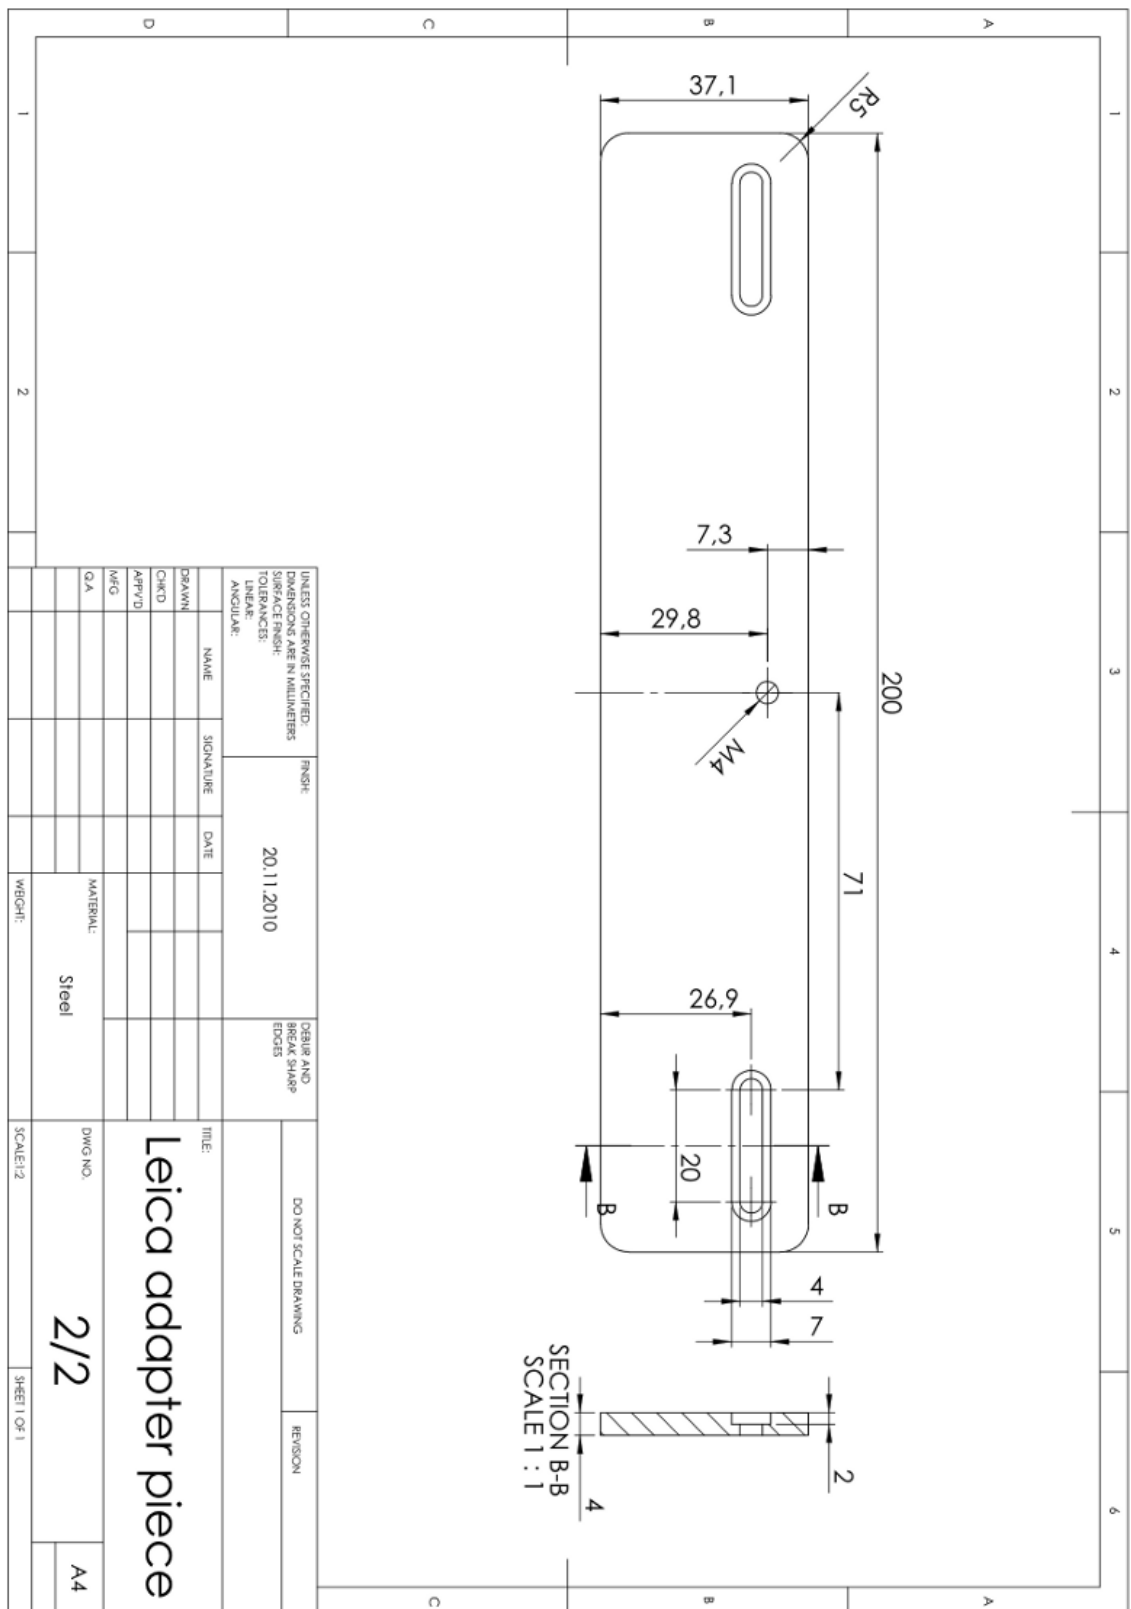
Back adapter piece for Quickslide stage. Drawing is made with AutoCAD2007 and all dimensions are in millimeters.
